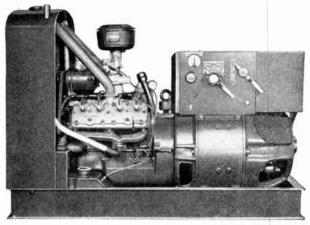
Single-operator d-c welder driven by a 60-hp automobile engine
